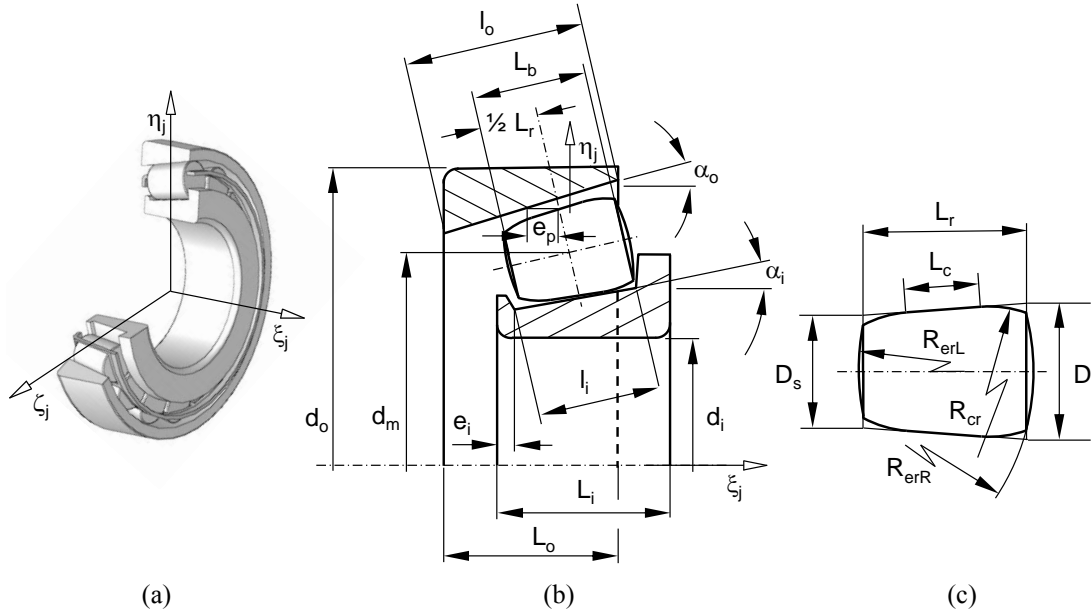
Tapered roller bearing: (a) Perspective view; (b) Bearing dimensions; (c) Roller dimensions.
